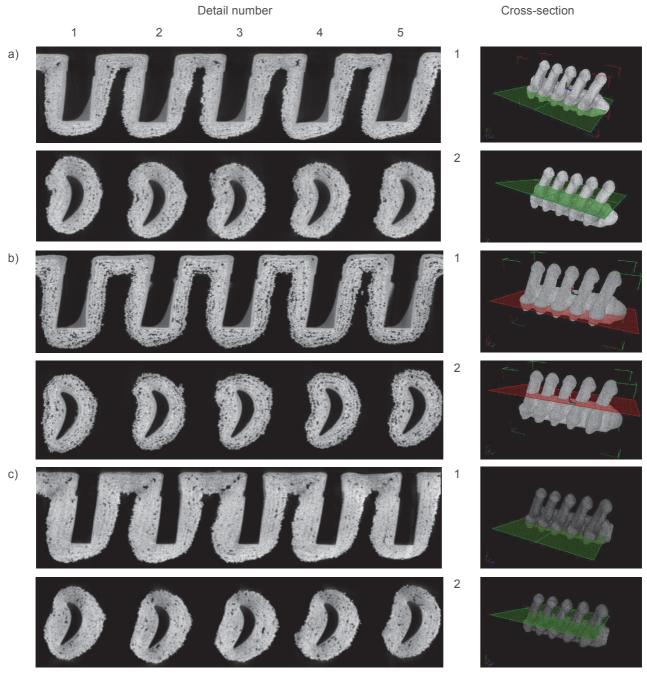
Transversal cross-section of moulds details: a) Form 1, b) Form 2, c) Form 3
